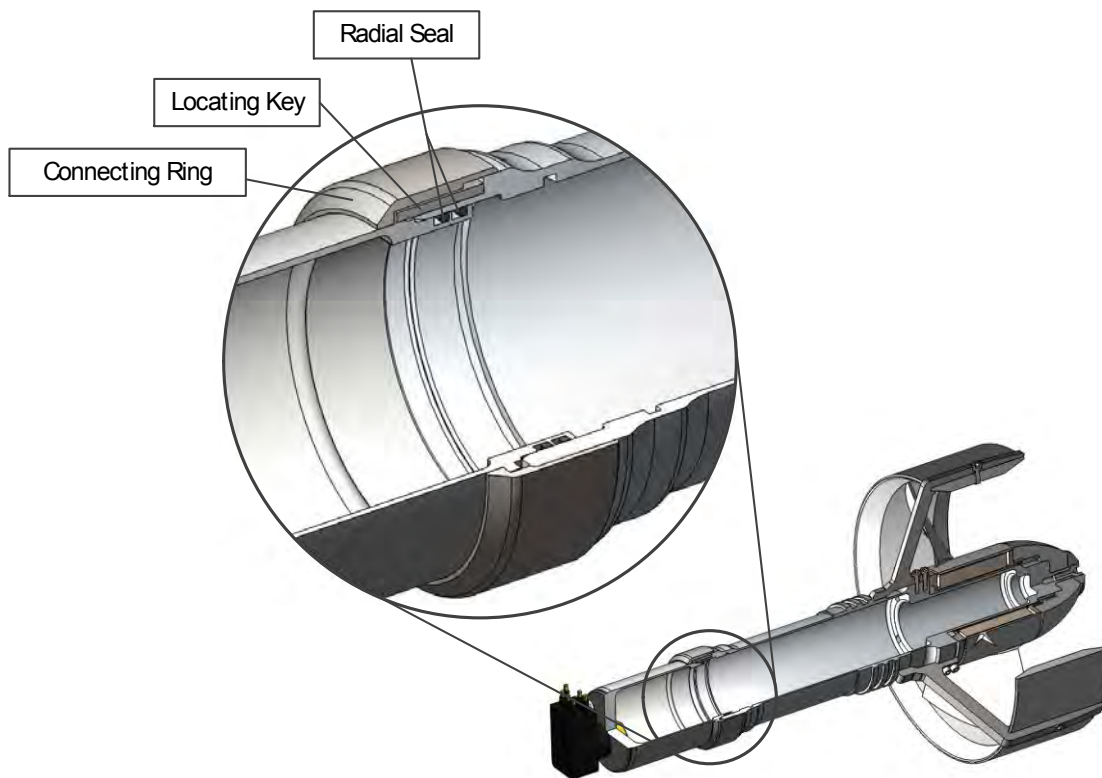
Thruster Housing - Modified Connection Design Diagram
